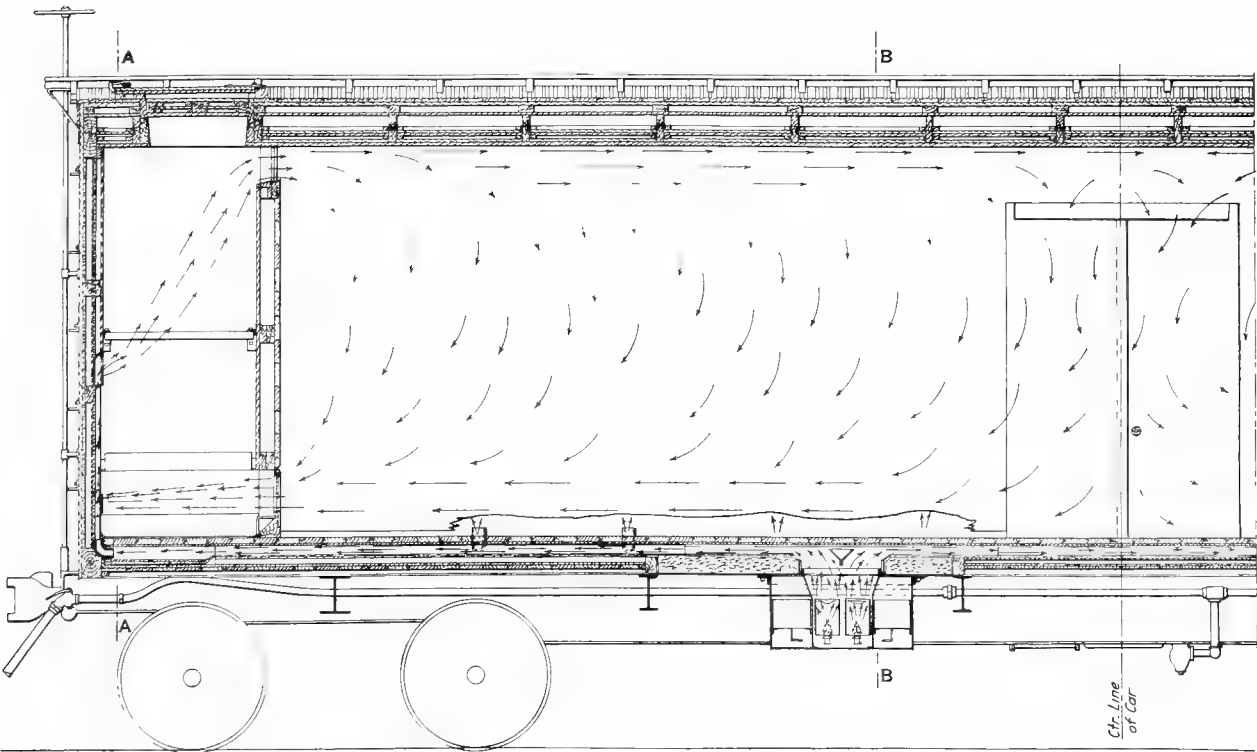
Section Through Refrigerator Car Equipped with the Alcohol Heating & Lighting Company's Heating System, Showing Location of Heater and Passages, and Flow of Air Currents.
